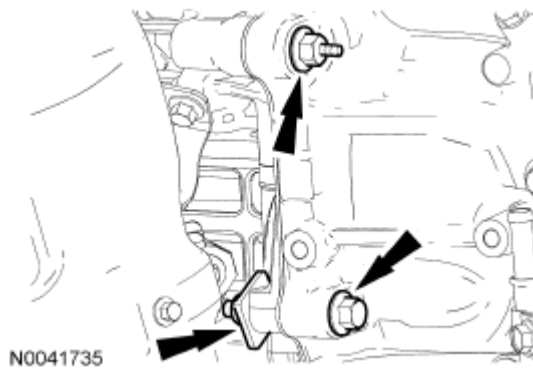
Locating Transaxle-To-Engine Stud Bolt, Bolt And Nut
